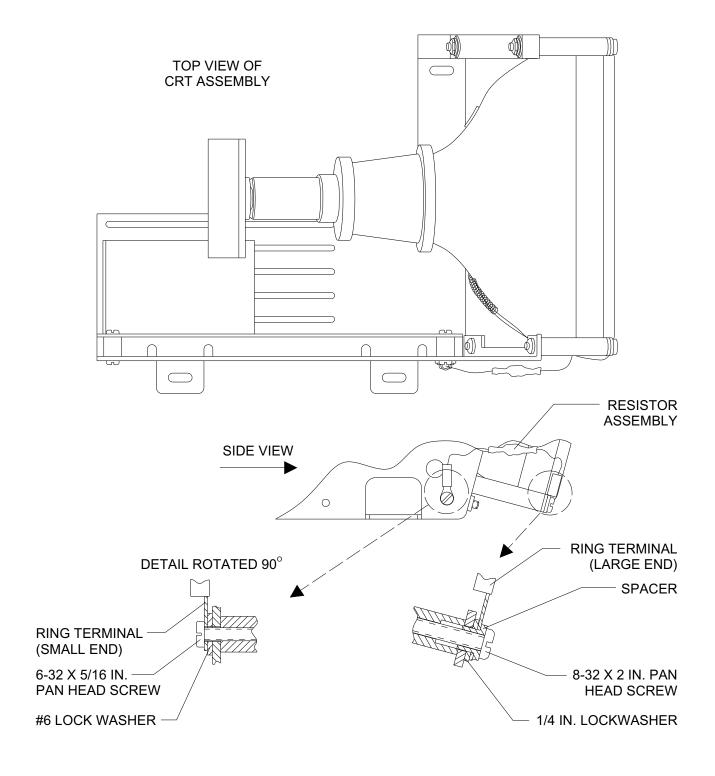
CRT ASSEMBLY AND RESISTOR INSTALLATION DETAILS
